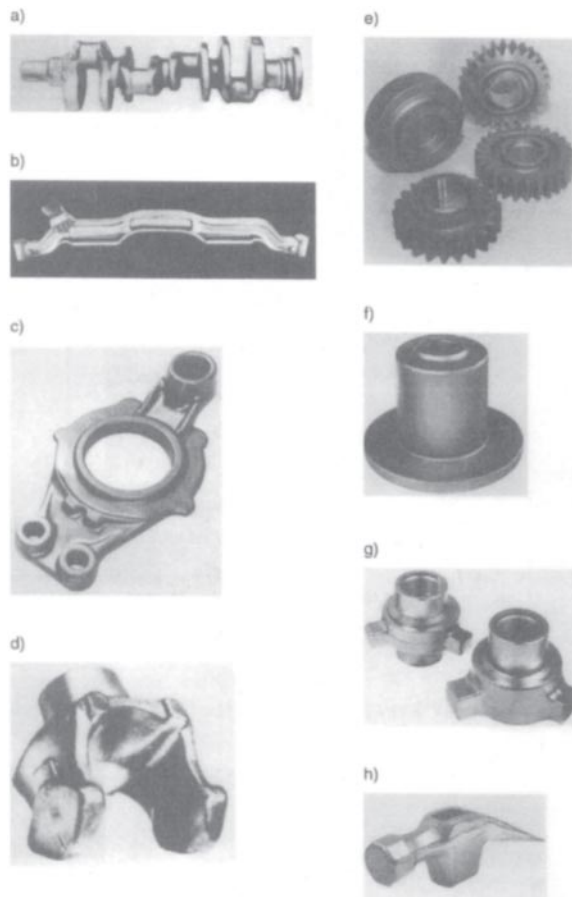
Examples of forged parts: (a) automotive crankshaft; (b) truck axle; (c) truck bracket; (d) universal joint; (e) automotive gears; (f) truck assembly part; (g) coupling fittings; and (h) hammer head. (From Ref. 1.)
